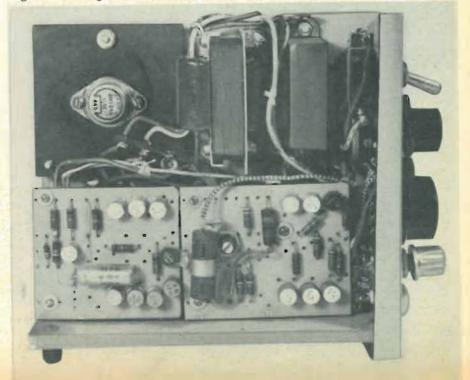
In this regulated dc power supply, board shown in Fig. 2 is mounted on the right.
